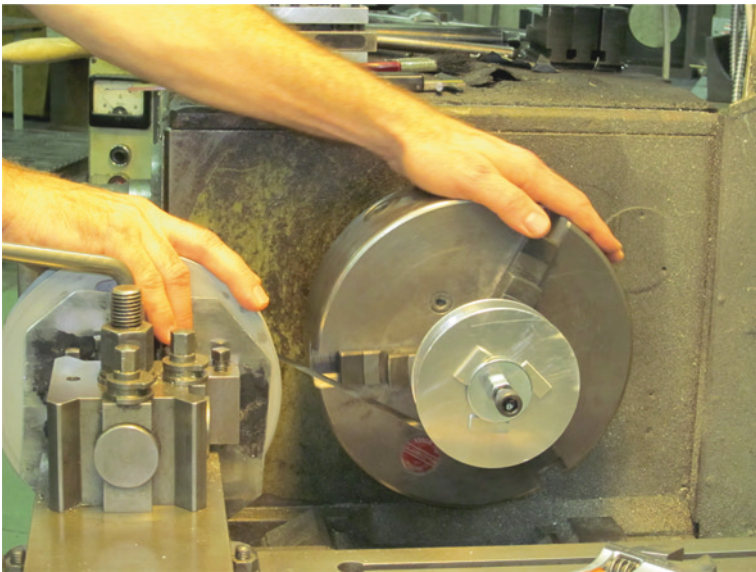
Transformer core development setup (raping of Metglas sheet)
